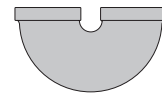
RETURN BENDS OPEN PATTERN-Right Hand
